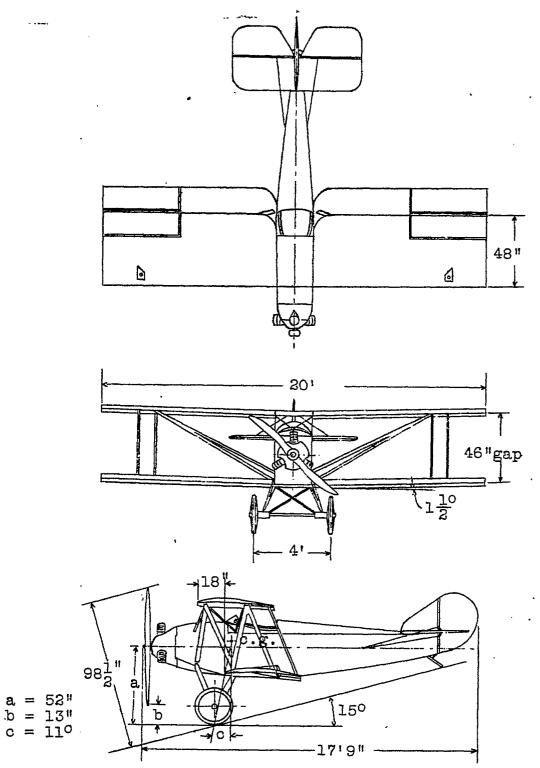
General arrangement drawing of Sperry Messenger airplane.
